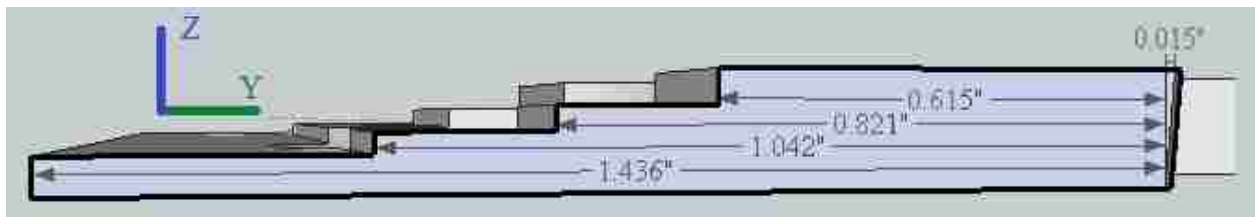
Cross sectional view of the 10x10 cm² upper trimmer lead plate in the in-plane dimension illustrating the lateral dimensions of the plate.
